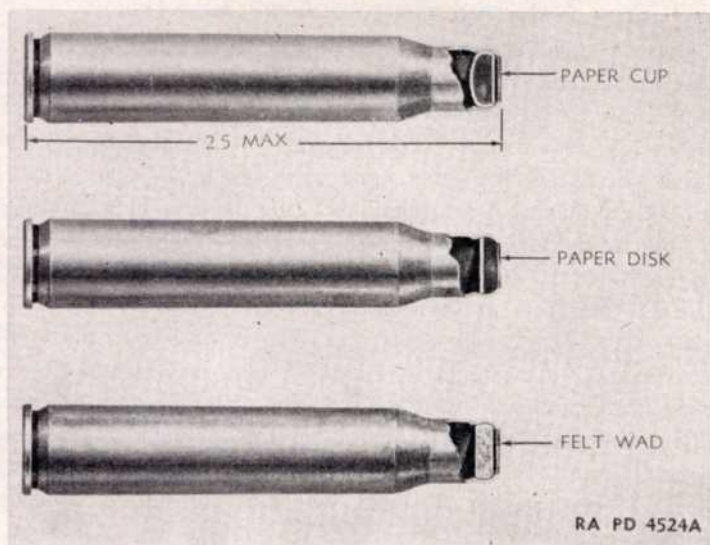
Blank cartridges, cal..30, M1909—necks in section showing wads.
